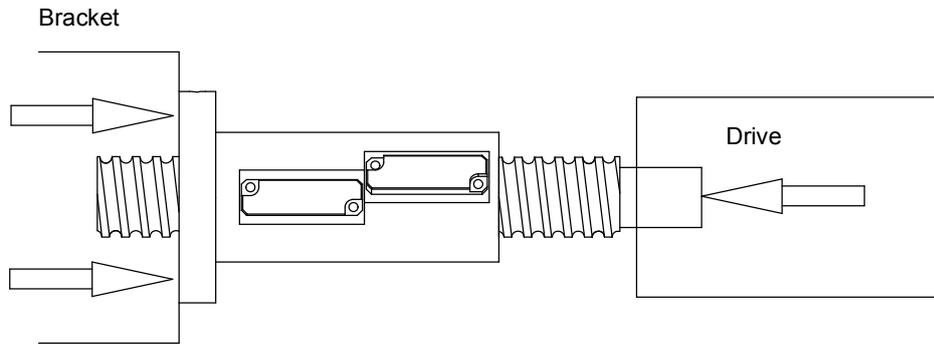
Recommend mounting direction of heavy load ballscrew
